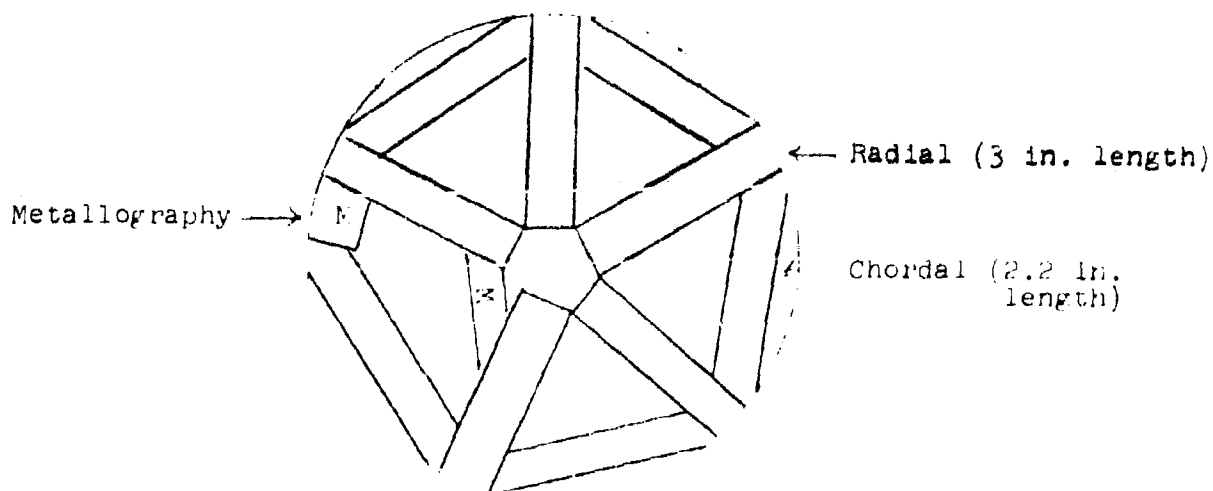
Sketch showing location of tensile and metallographic specimens from Ti-6Al-4V skull melt impeller casting.
